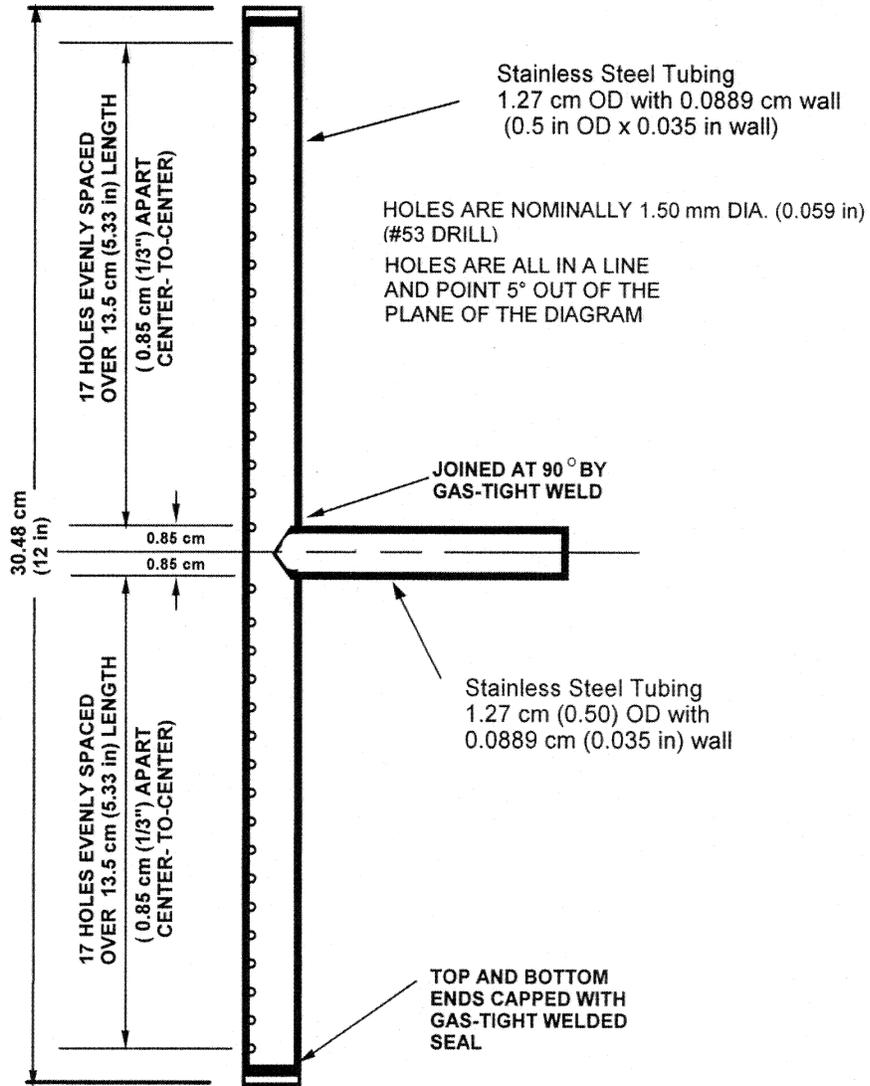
DETAILS OF HORIZONTAL BURNER HEAD.
